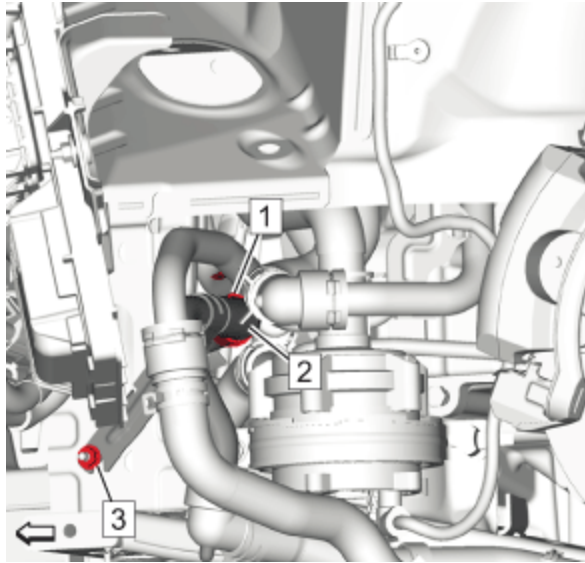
Drive Motor Control Module Radiator Outlet Hose Bracket Nut
